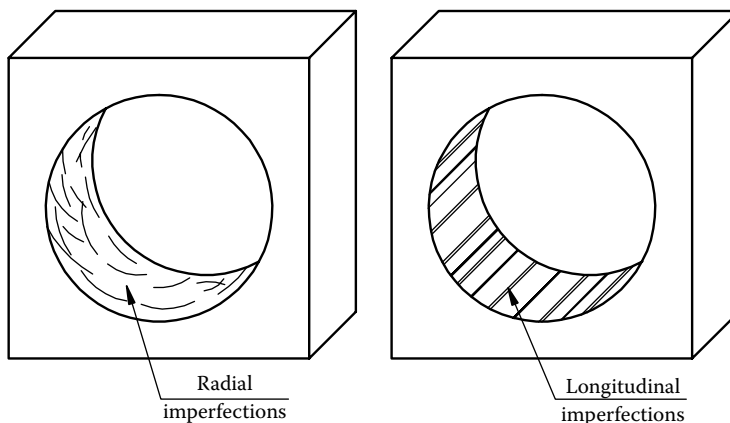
Surface imperfections in machined tubesheet. (Courtesy of Elliott Tool Technologies Ltd, Dayton, OH.)
